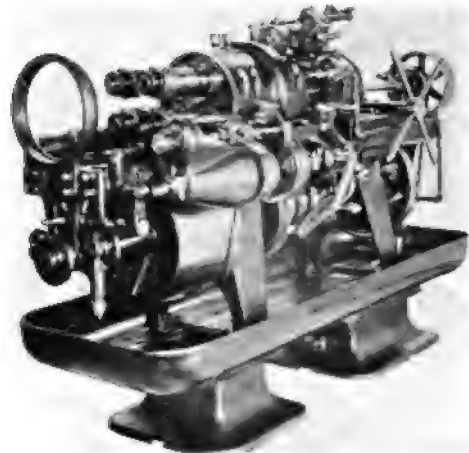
FOUR-SPINDLE AUTOMATIC SCREW MACHINE.
